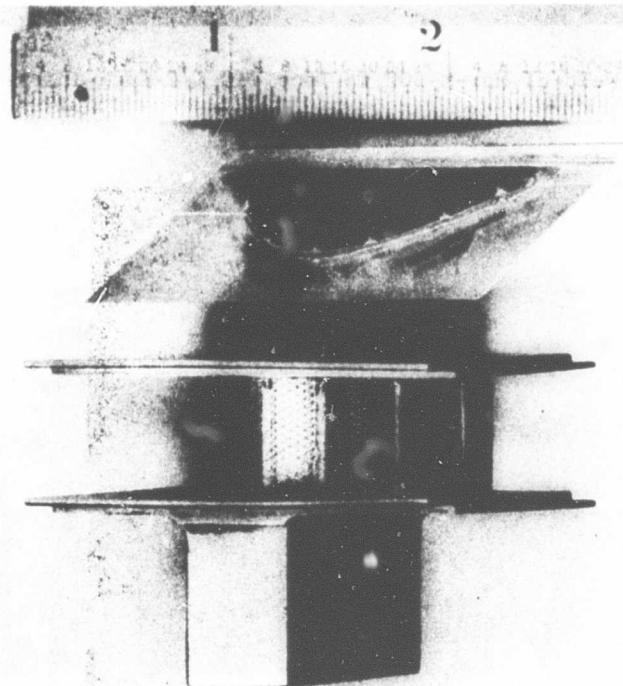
A Composite Picture of an EB Welded Stator Blade. (Note the Size of the Blade.)
